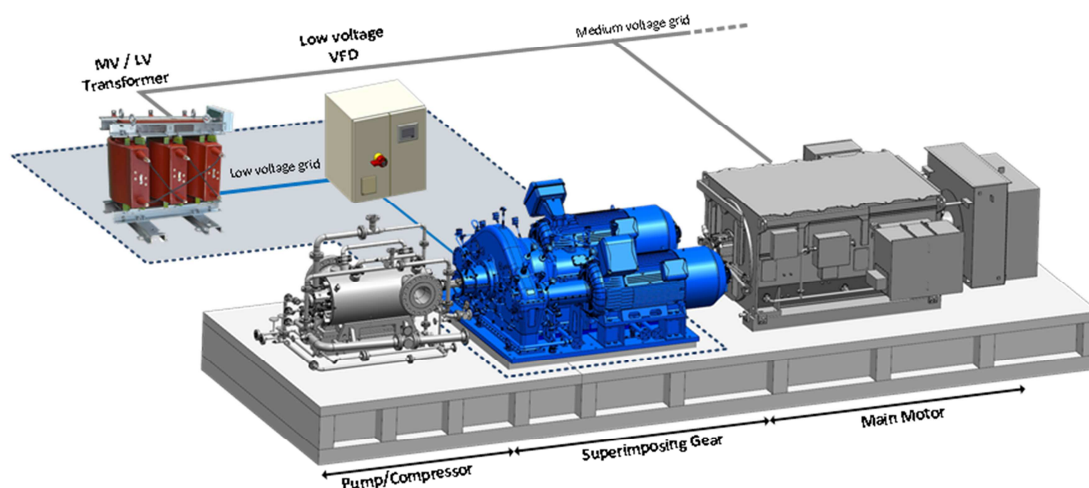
Drive Train with Electrically Controlled Superimposing Gear.
